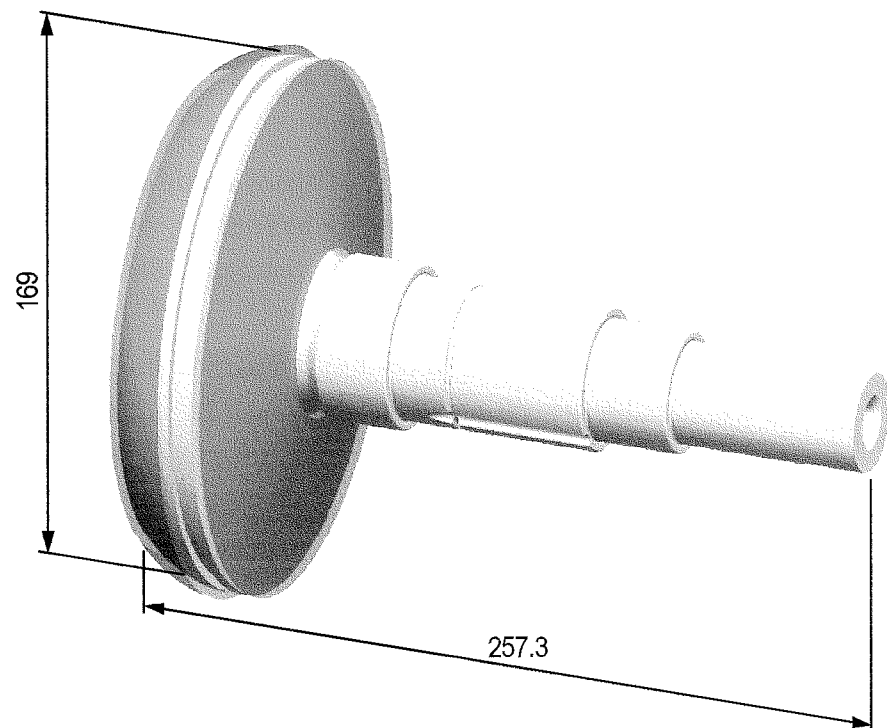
CVT component, ultra-precision machined surfaces indicated in red
